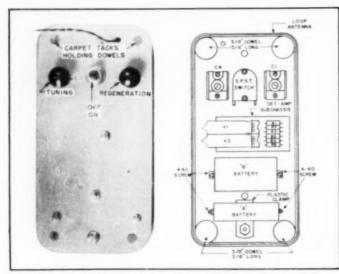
Front view of the receiver (left) showing location of the various controls. Mechanical drawing indicates how the various component parts should be placed.
